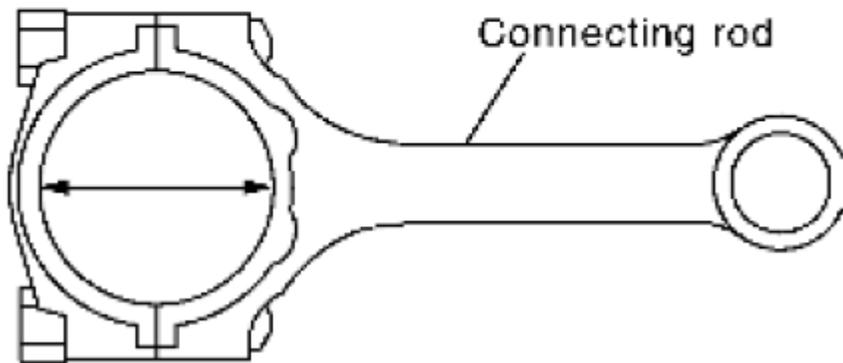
Identifying Inner Diameter Of Connecting Rod Big End
